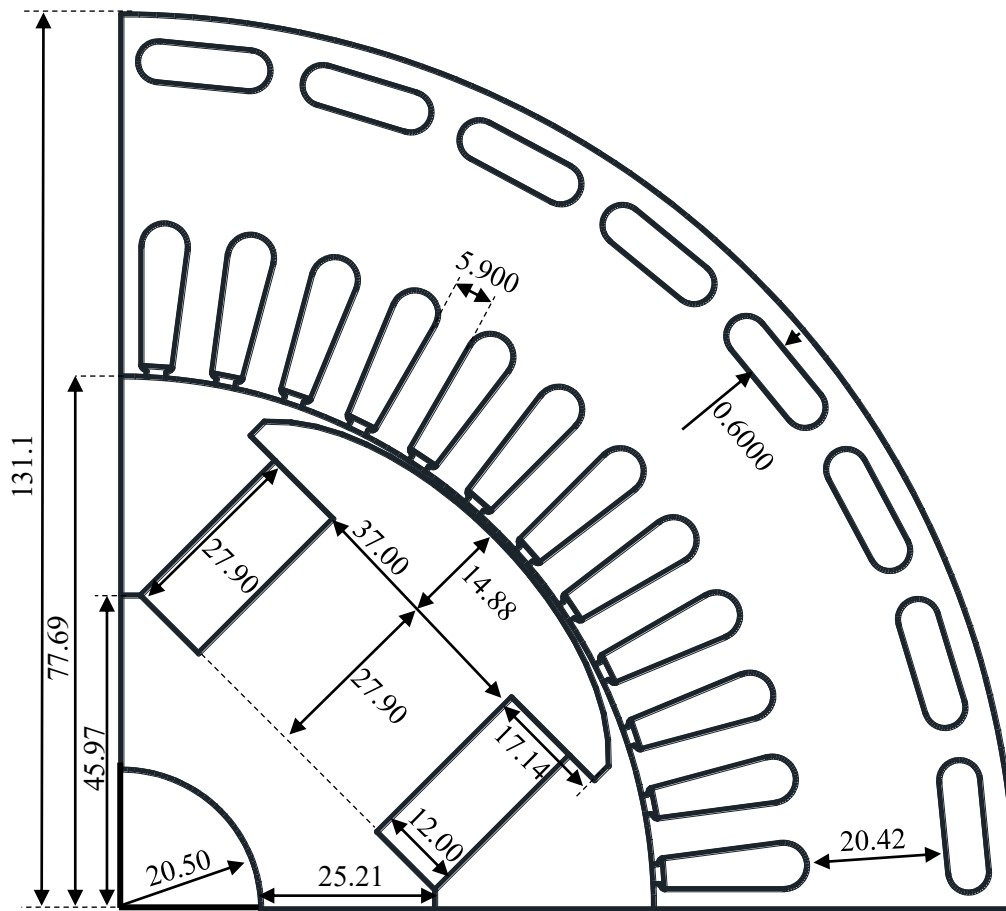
Dimensions of the ZOE motor geometry in mm.
